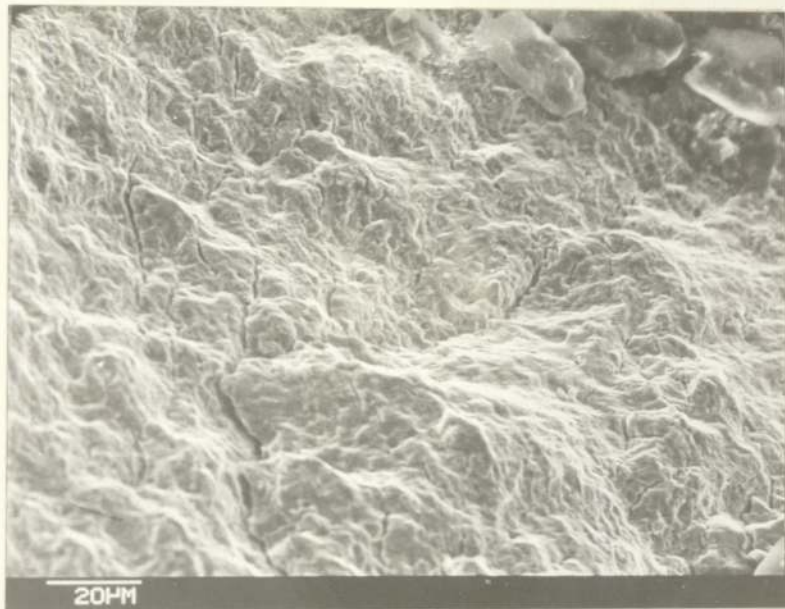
S.E.M. fractograph of a hardened and tempered No.5 die steel testpieces showing brittle failure and the direction of crack propagation (testpiece surface is nearer the top of the fractograph).
